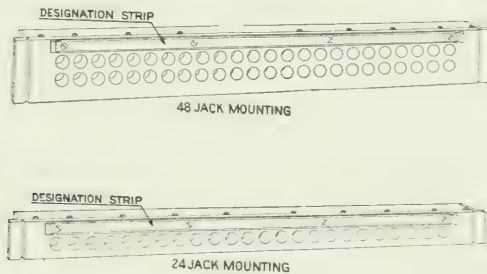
Typical Assembly of Jack Mounts for Panel Mounted Test Board
